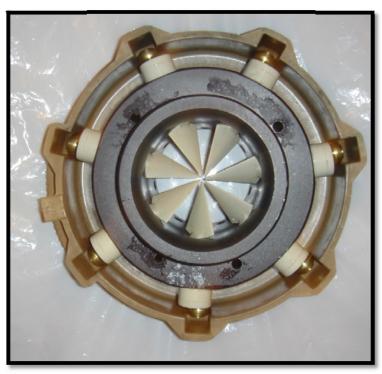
The drive housing with the throat, IGV and cam arms attached. The black part is the throat, the cam rollers can be seen in the slots of the drive housing, and the IGV are the triangular shaped pieces in the middle.
